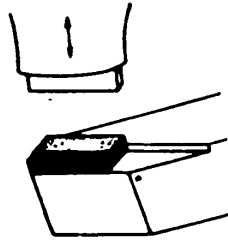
Grinding of a Chip Breaker. The tool is a piece of flat iron. Drilling carbide was used.
